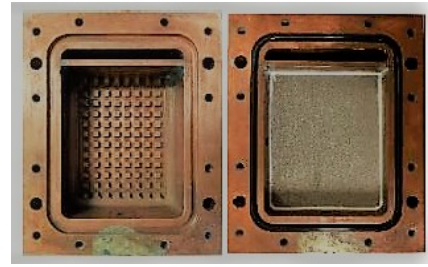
Internal shape of evaporator with and without stainless-steel sintered wick.
